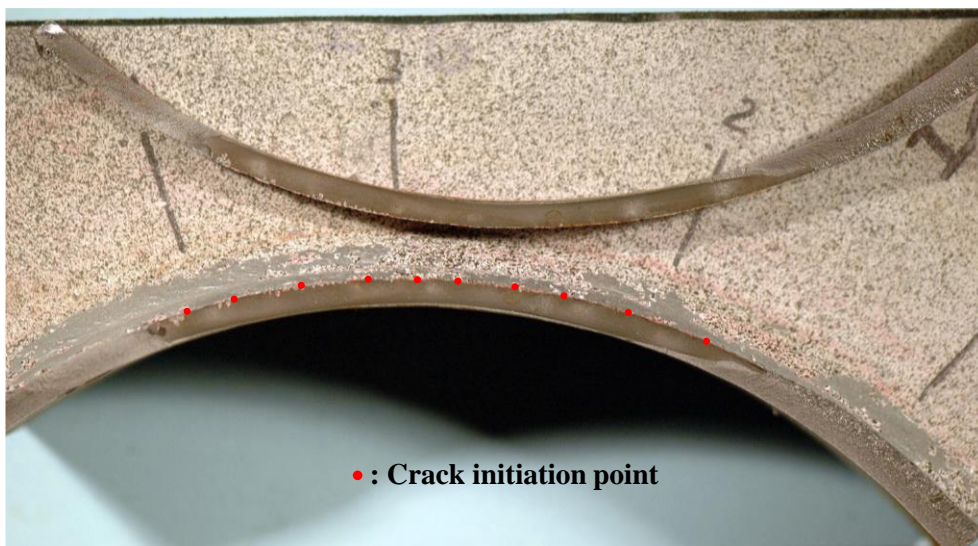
Fatigue fracture surface and identified crack initiation points in Type I-6 Arm
